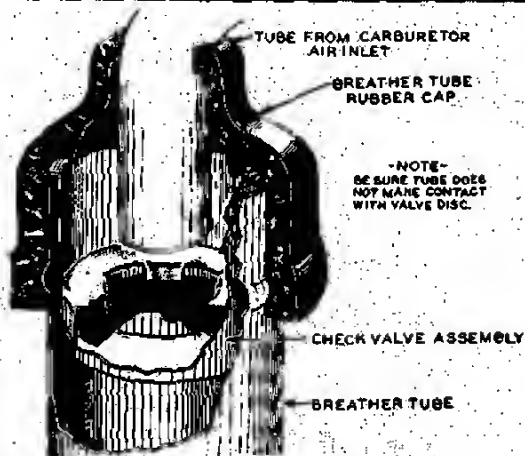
SERVICING THE CRANKCASE BREATHER VALVE
